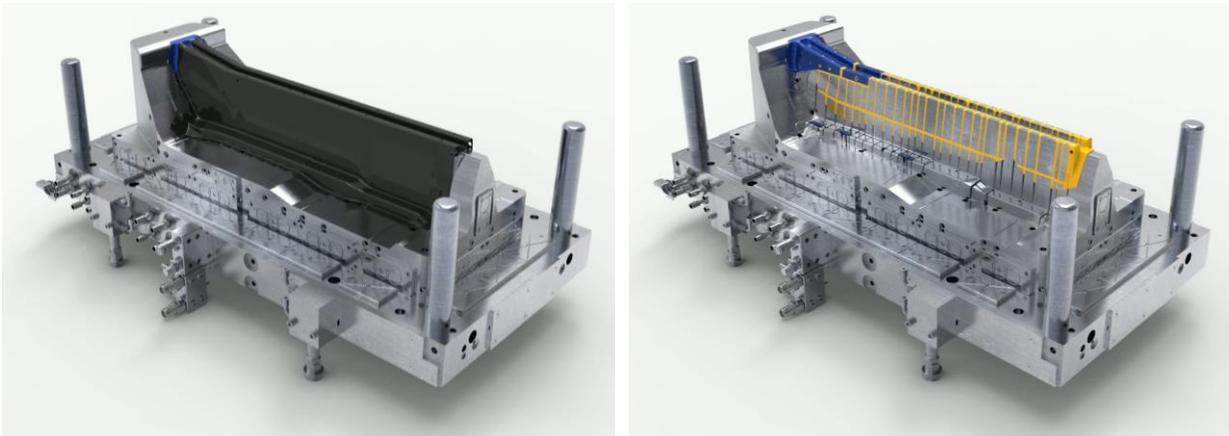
Tool animation inside the injection molding machine with upper mold half made invisible - draped laminate (left) and injection molding process with laminate made invisible (right) with blue metal inserts
